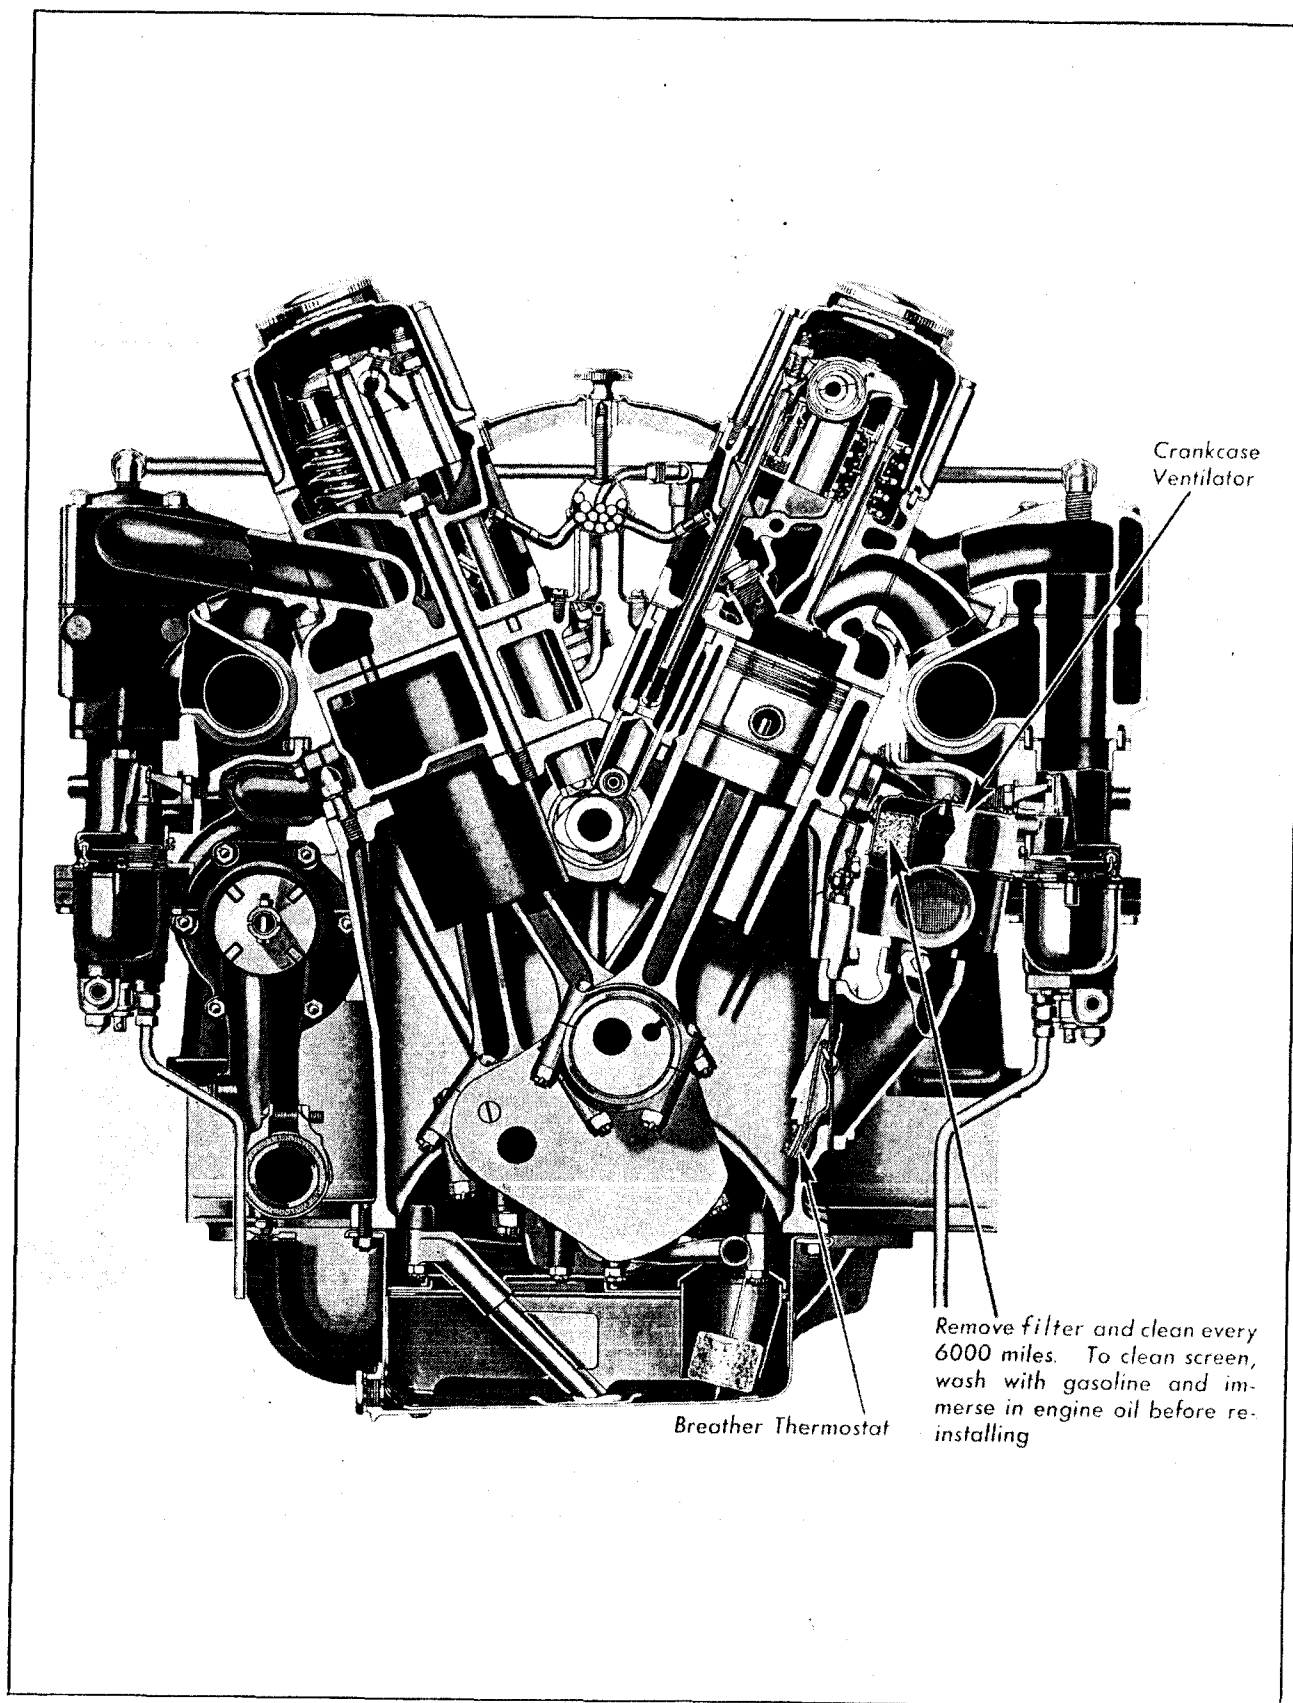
Cross-sectional View of Cadillac 370-B. Typical of Cadillac 452-B except Number of Cylinders
